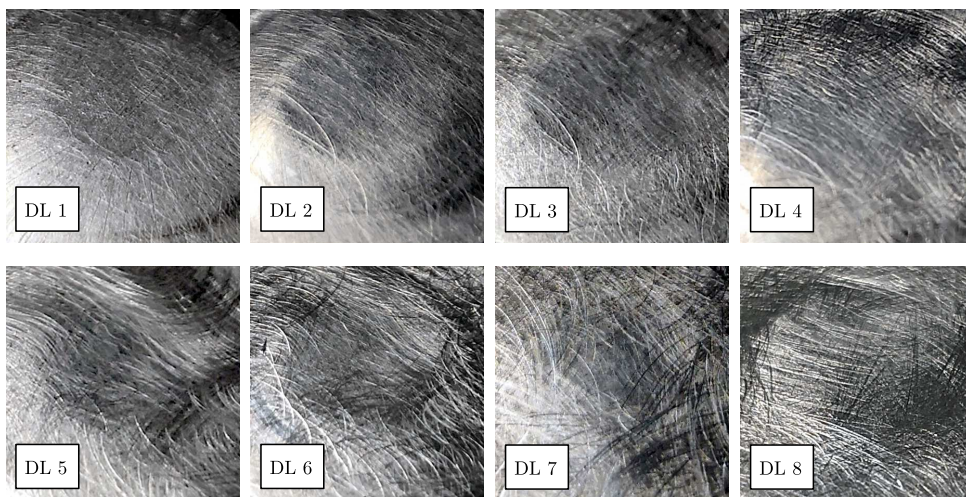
Damage on roller ends in dataset 2. DL 1: P400, DL 2: P400 Heavy, DL 3: P320, DL 4: P220, DL 5: P220 Heavy, DL 6: P80, DL 7: P8 Heavy, DL 8: P80 Very Heavy
